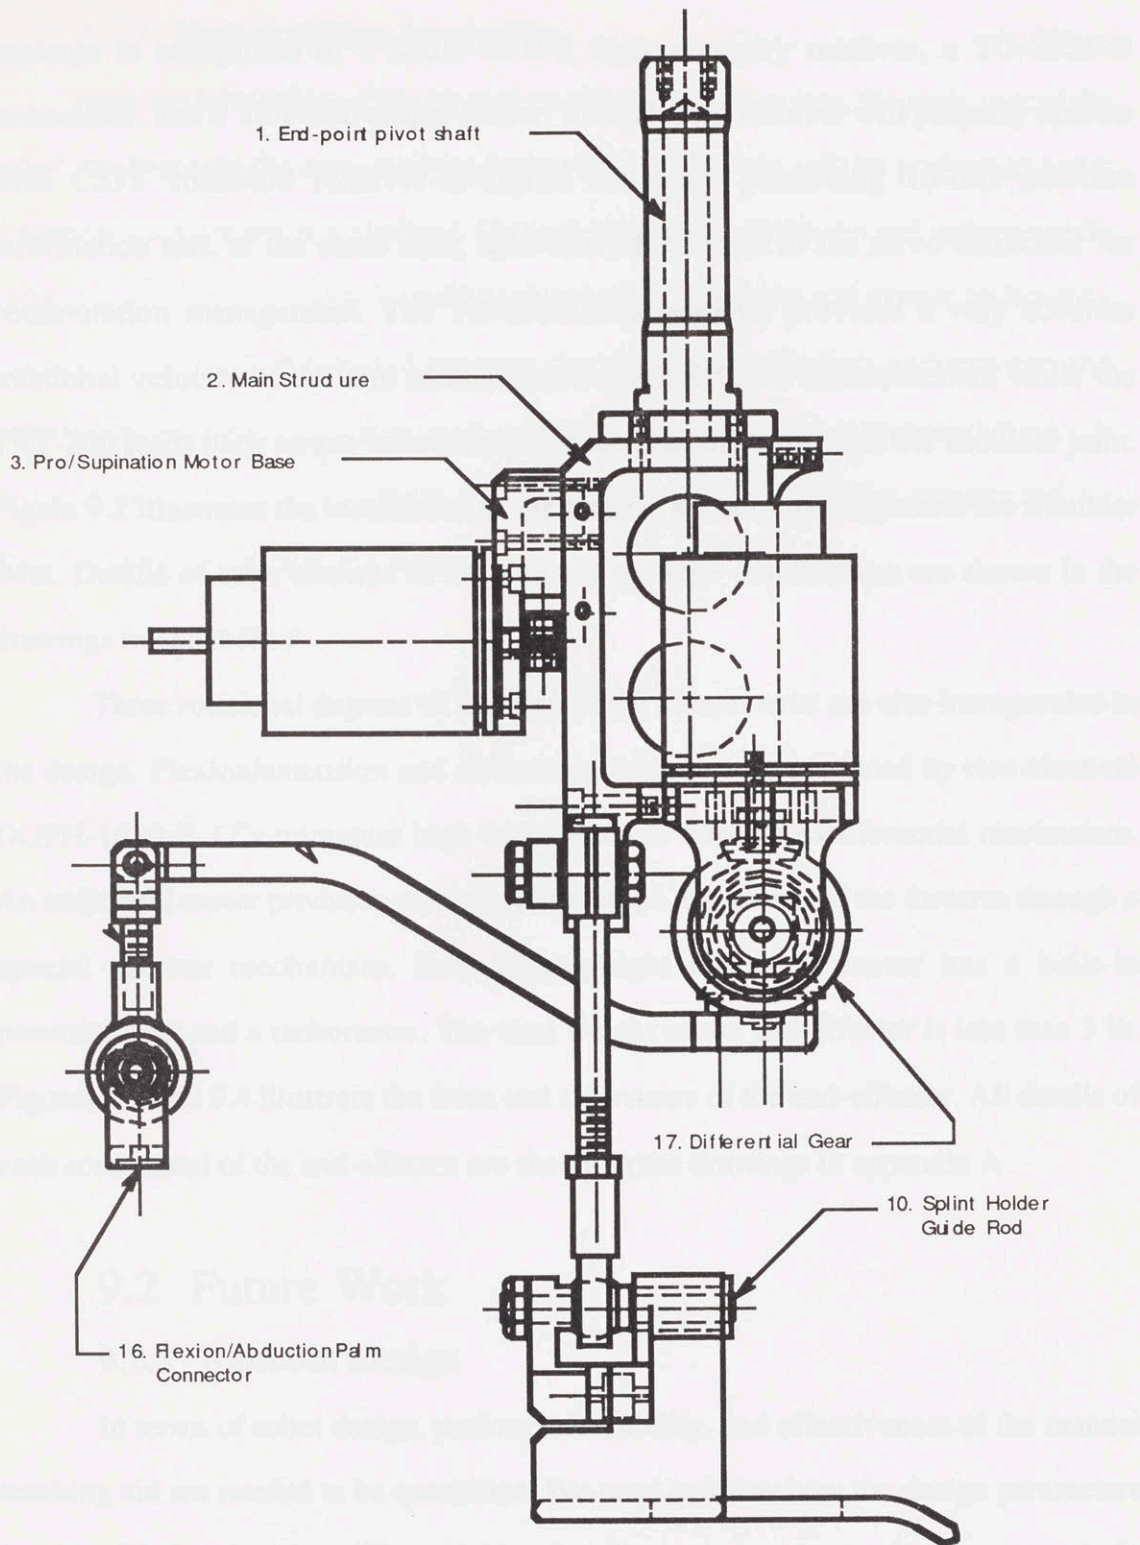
Side View of the End-Effector (scale 1:1.81, drawing ASB E01)
